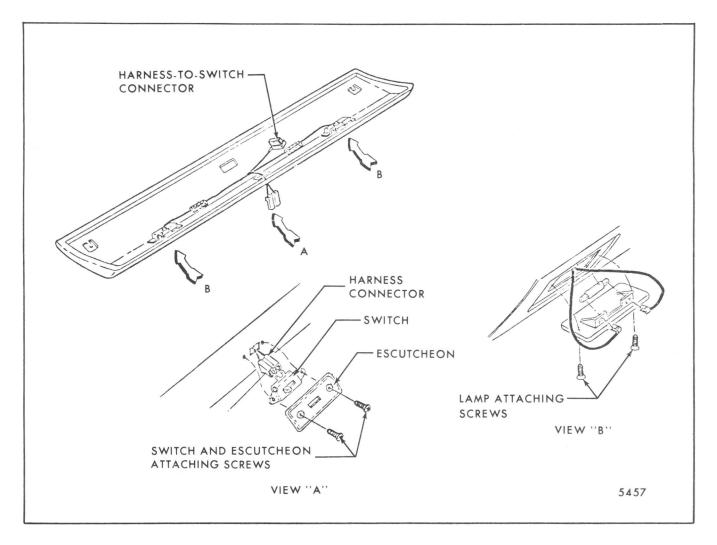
Front Seat Back Courtesy Lamps and Lamp Switch - Oldsmobile Luxury Sedan
